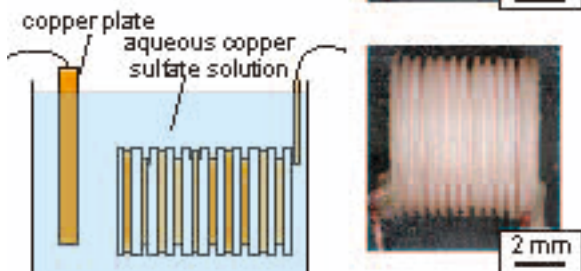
Fabrication process of micro coil which was fabricated by winding wire and electroplating of Cu.
